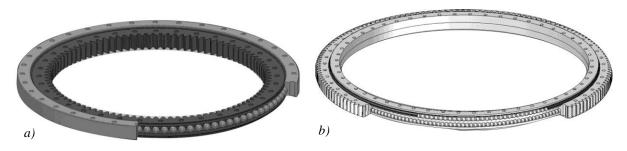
The examples of the slewing bearings: a) single-row ball bearing with internal mesh, b) double-row ball bearing with external mesh
